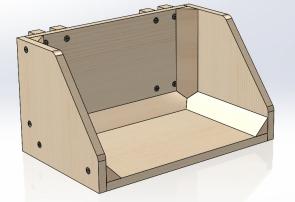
B. New foot rest made of plywood with triangular anchors made of maple wood along the inside corners of the foot rest.
